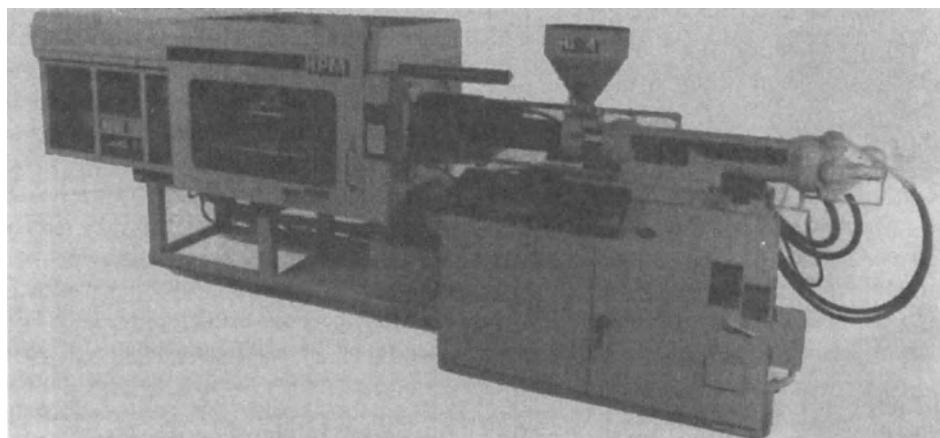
HPM 300-ton clamp reciprocating screw injection molding machine for thermoset plastic processing.
